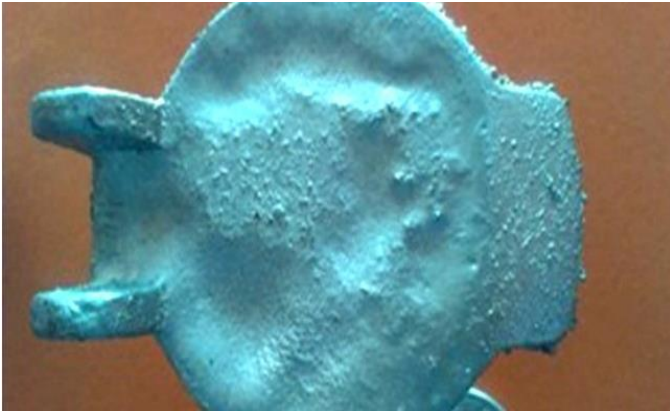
Defective Casting from Experimental Trial 3 showing shrinkage porosity and metal sinking
